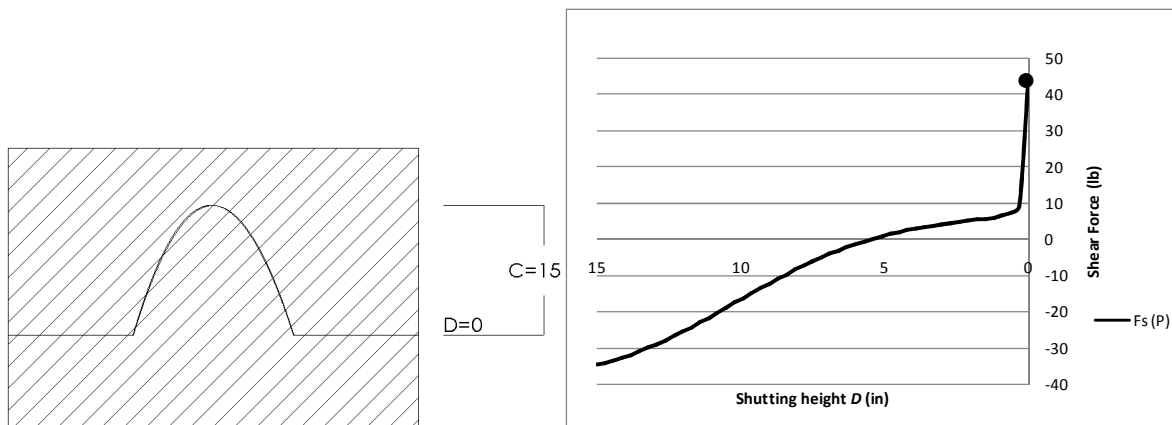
Bending Sheet Metal about Parabola ($D = 0$ in.)
